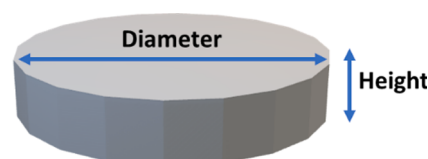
3D design of the cylindrical shape used for the design of experiments.
